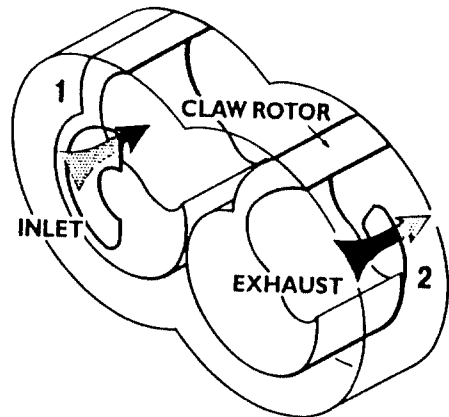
A claw stage showing the location of the inlet and exhaust ports.
